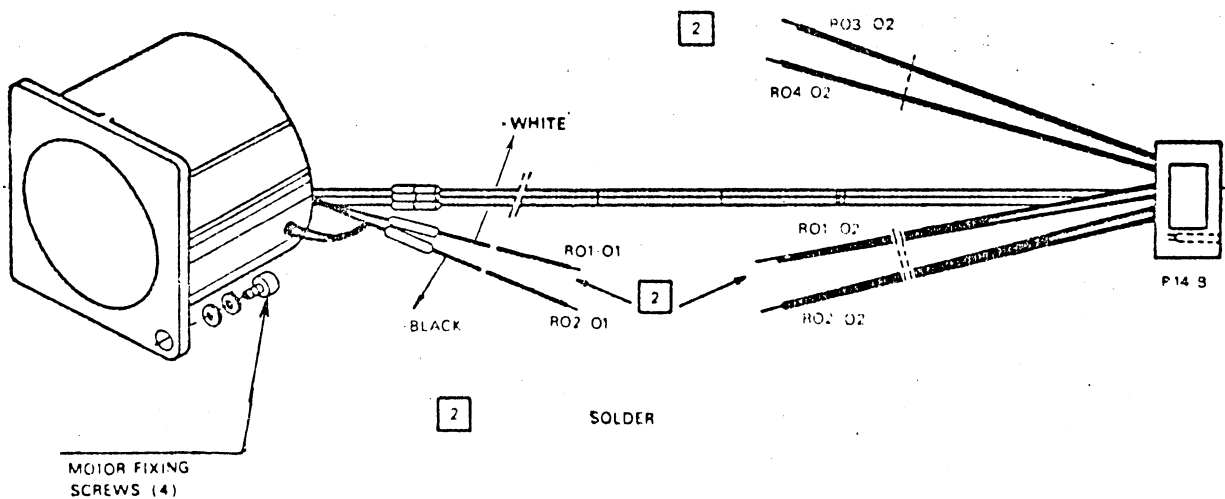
MARA Mechanics Carriage Motor Assembly
